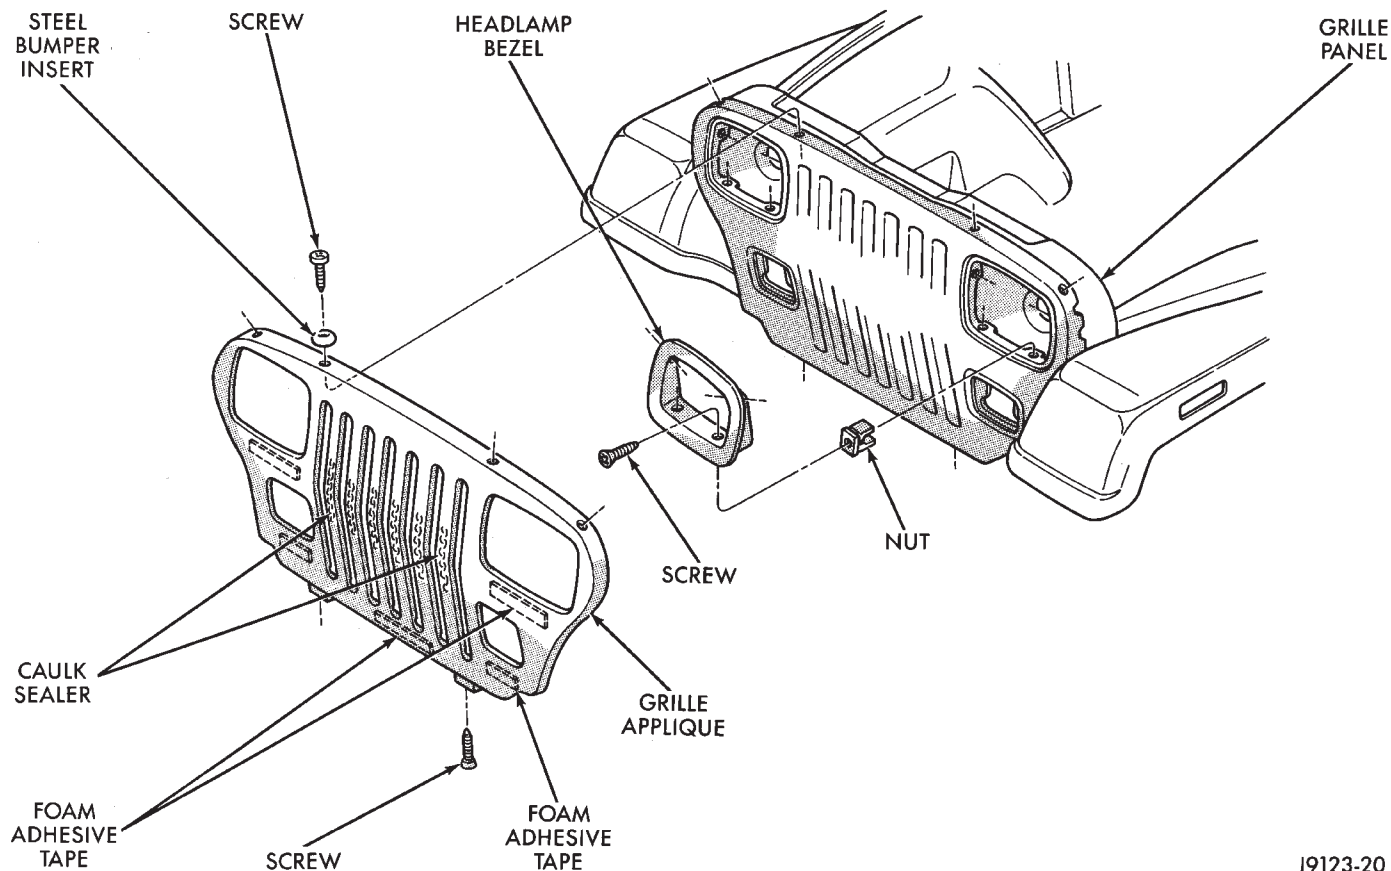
Grille Applique, Headlamp Bezel and Grille Panel
